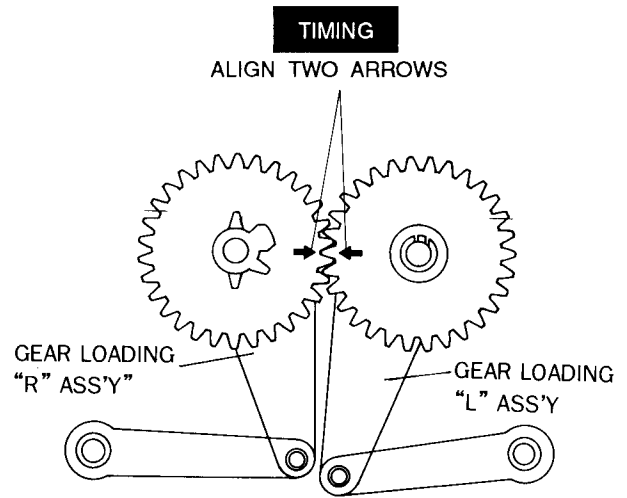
Reassembly of Gear Loading "L", "R" Ass'y
